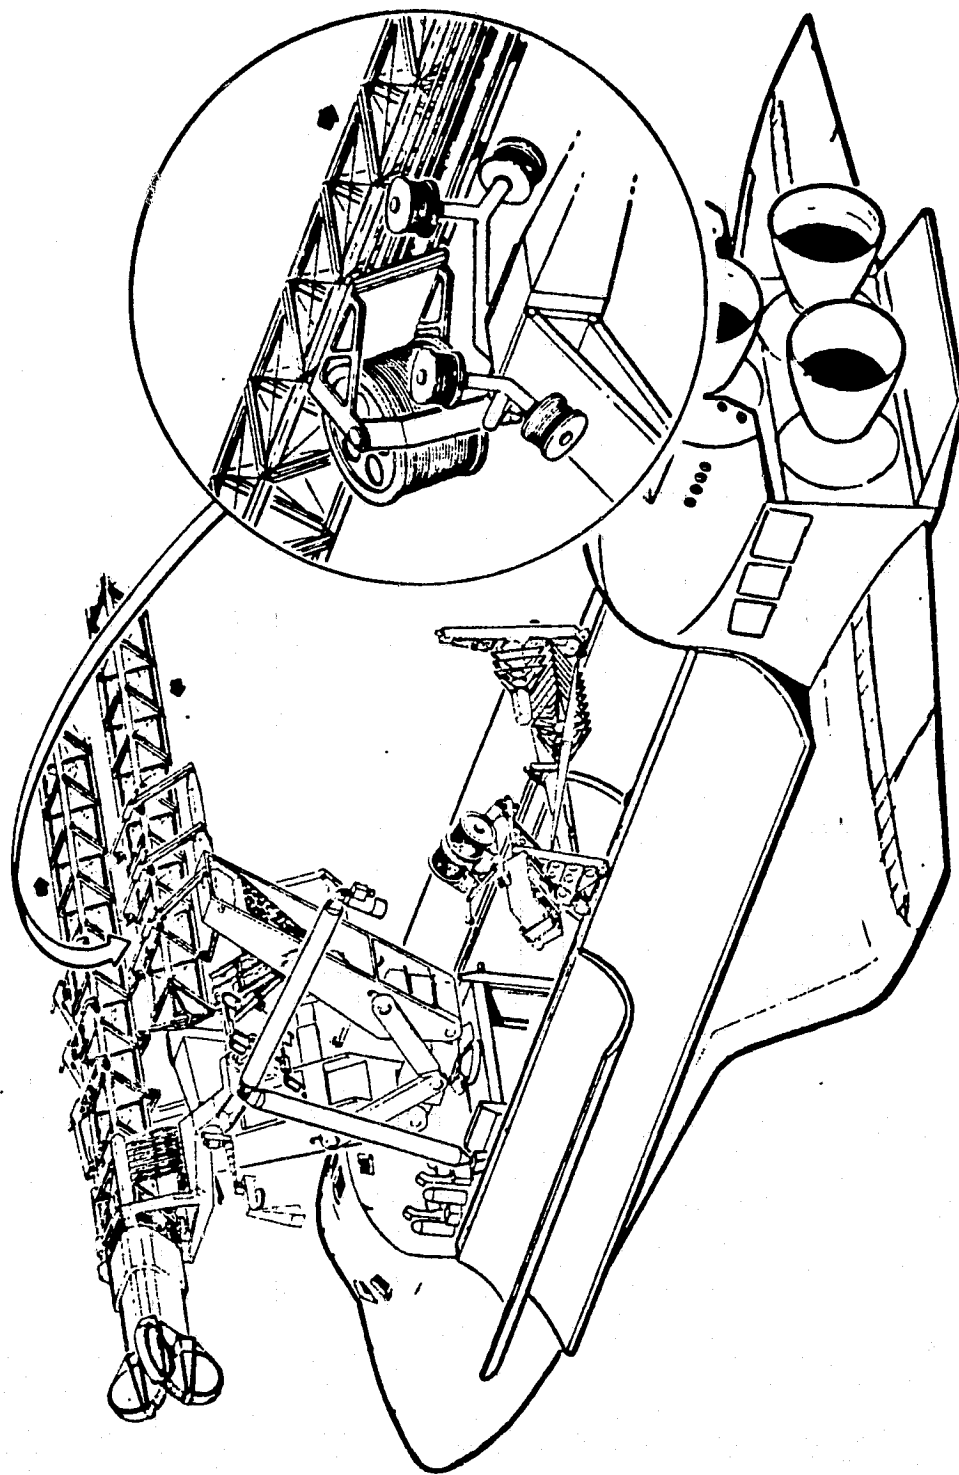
Fabrication of 2nd Longitudinal Beam During
